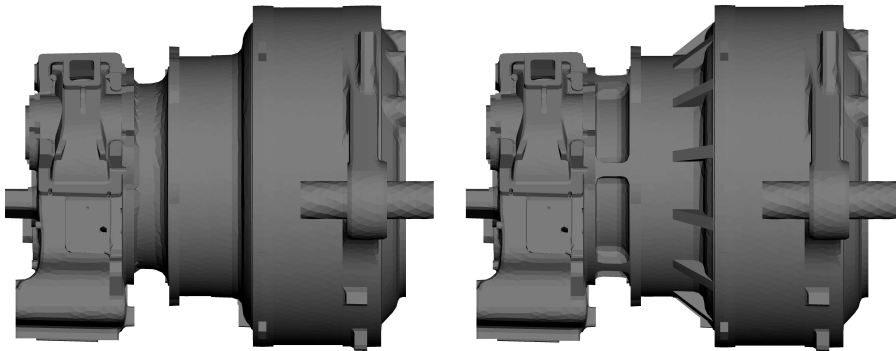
Additional ribs to stiffen the gearbox housing. Left: original housing, right: modified housing.
